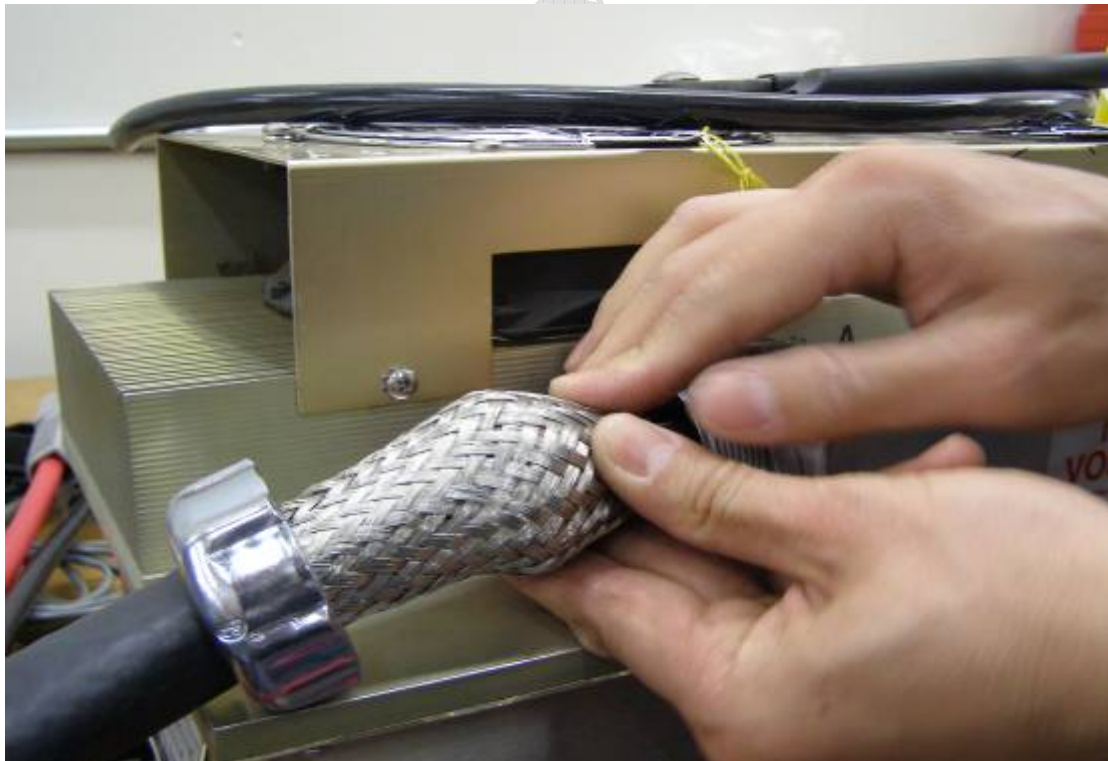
Shows fitting rubber seal slid underneath cable shield.
